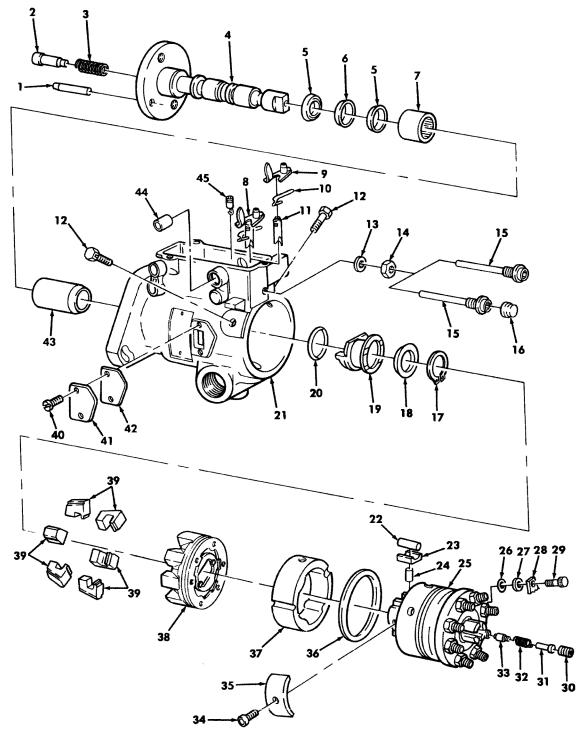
Fuel Injection Pump Housing, Head and Rotor, Drive Shaft, and Related Parts.
